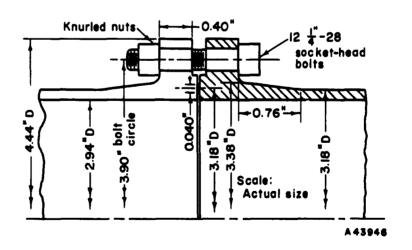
3-IN. CLASS Ib BOLTED FITTING, 1500 PSI AT -100 TO +200 F, AM-355
